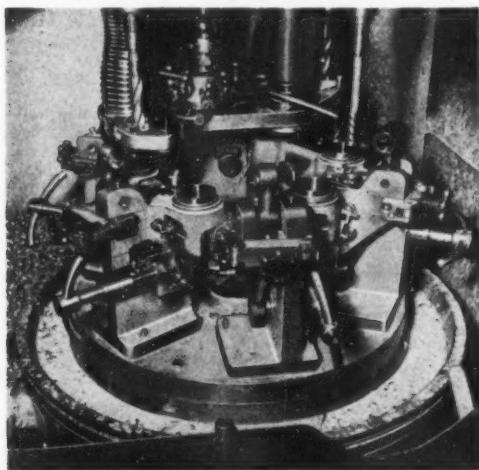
View of the Table of the Herman Kolb Machine, Showing Details of the Fixtures
